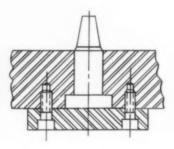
Plate retainer with cap screws. If rotation is a problem, flange may be flatted and core keyed to insert.
